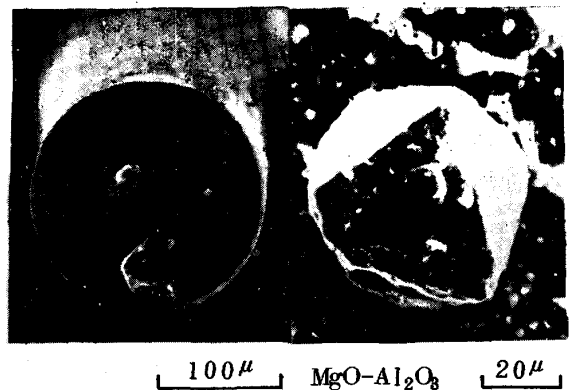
Typical fracture surface and inclusion extracted from fracture surface
